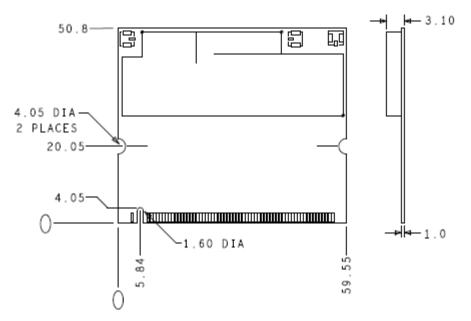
PCB and Shield Mechanical Drawing (dimensions in millimeters)
